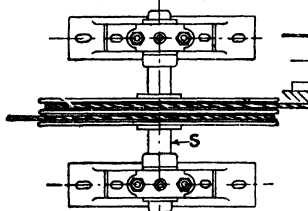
MOUNTED INTERMEDIATE PULLEY
